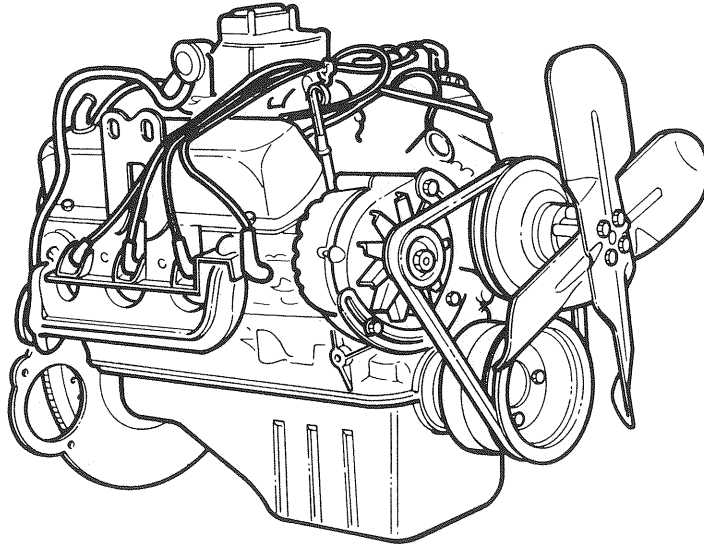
CSG-850 Engine — Typical (Left 3/4 Front View)
